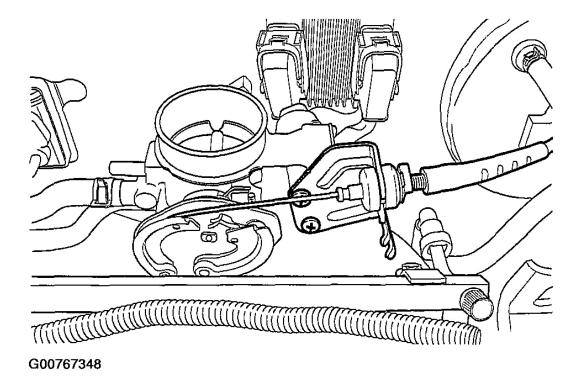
Connecting The Throttle Cable Courtesy of SUZUKI OF AMERICA CORP.
